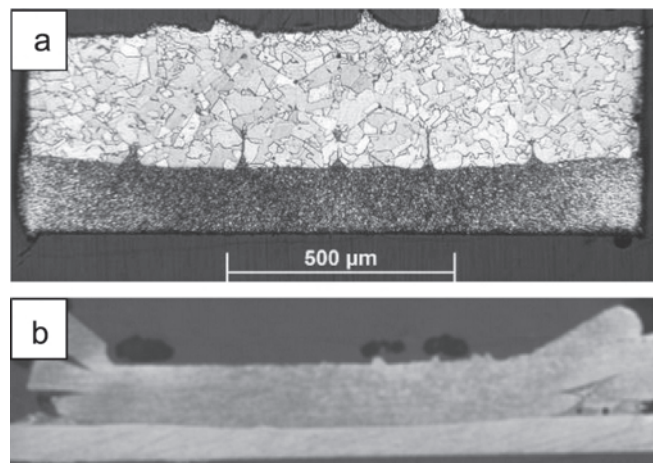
Macroscopic pictures of joints welded without compacting: cross-section (a) and longitudinal section (b) of the welded joint (thickness of the terminal is 200 µm)
